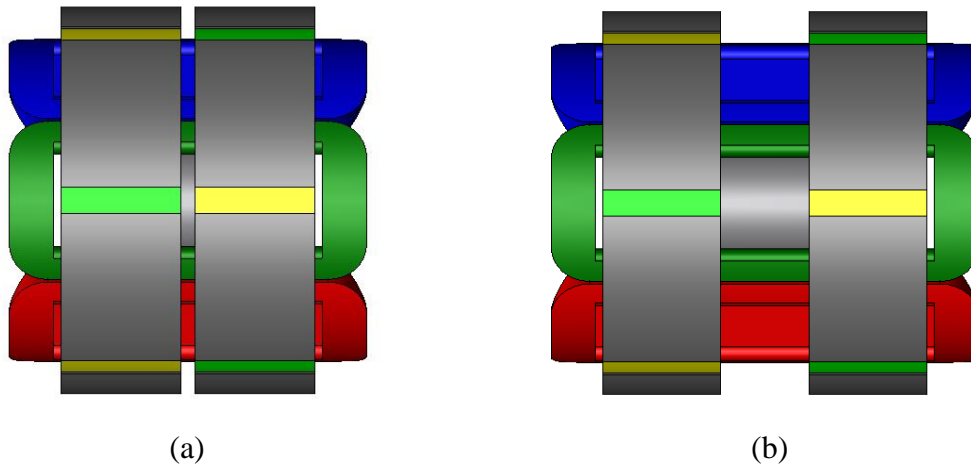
Dual-stator 6/4 FSPM machine with a stator gap length of (a) 5 mm and (b) 30 mm
